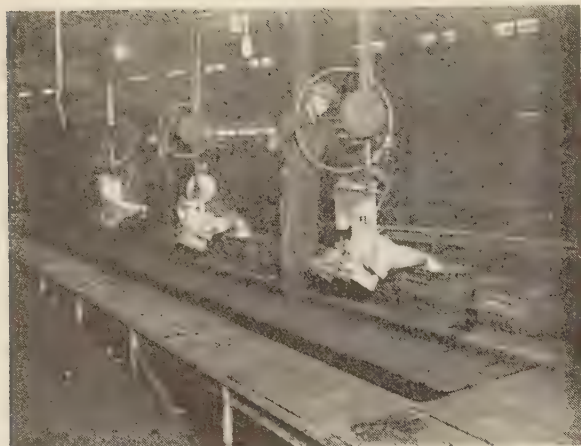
POURING CONVEYER FOR CONTINUOUS-TYPE MOLD CONVEYER
